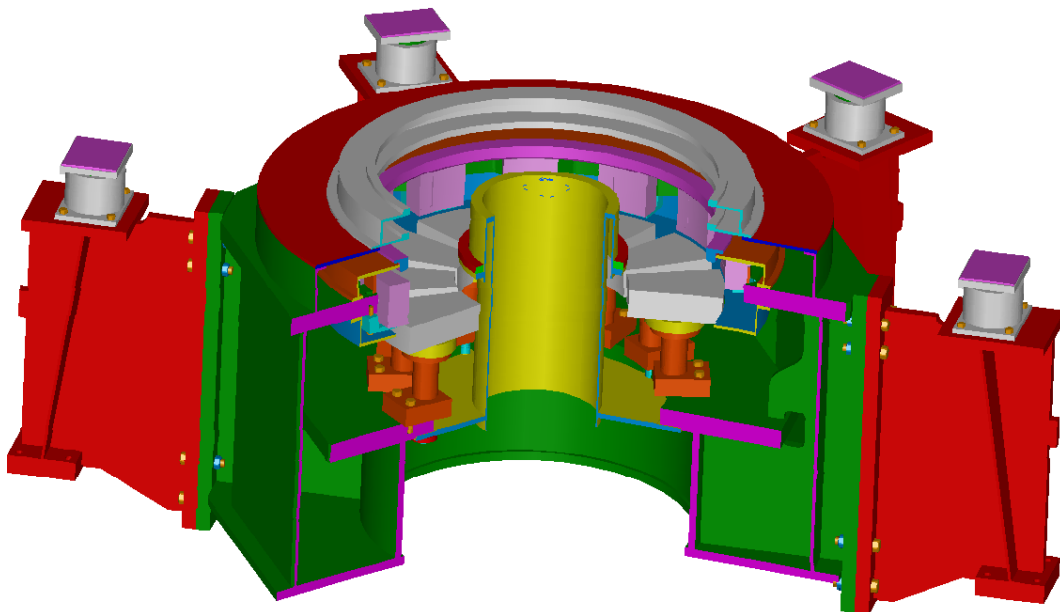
Typical combined thrust-guide bearing housing of a large hydro generator (ALSTOM Hydro)
